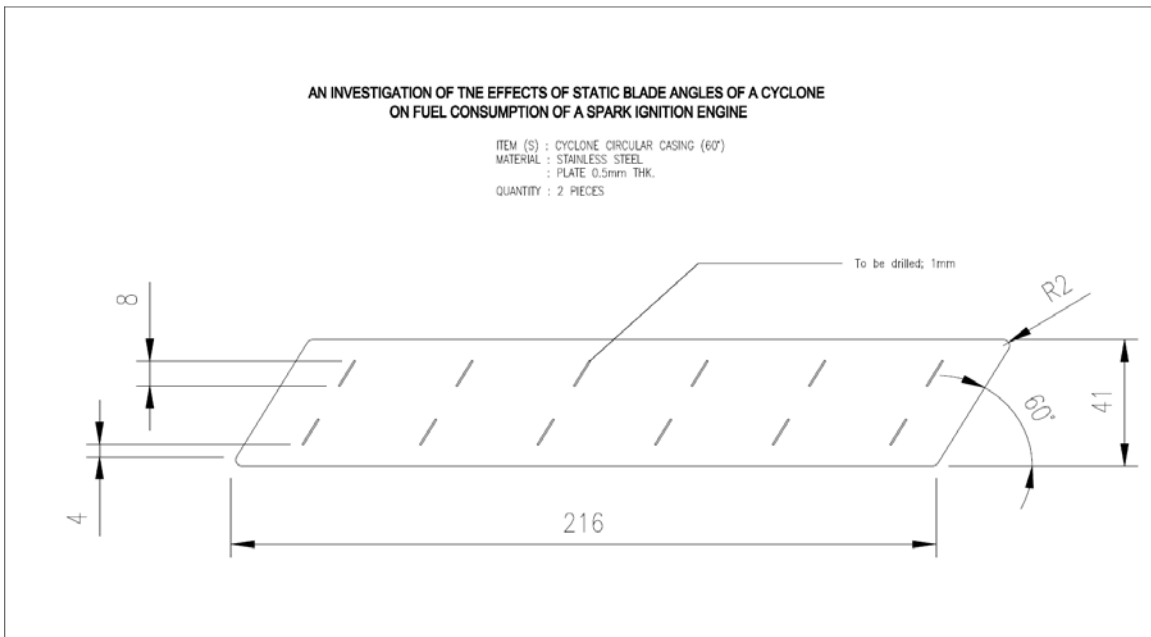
Drawing of Circular Cyclone Casing with 60°
